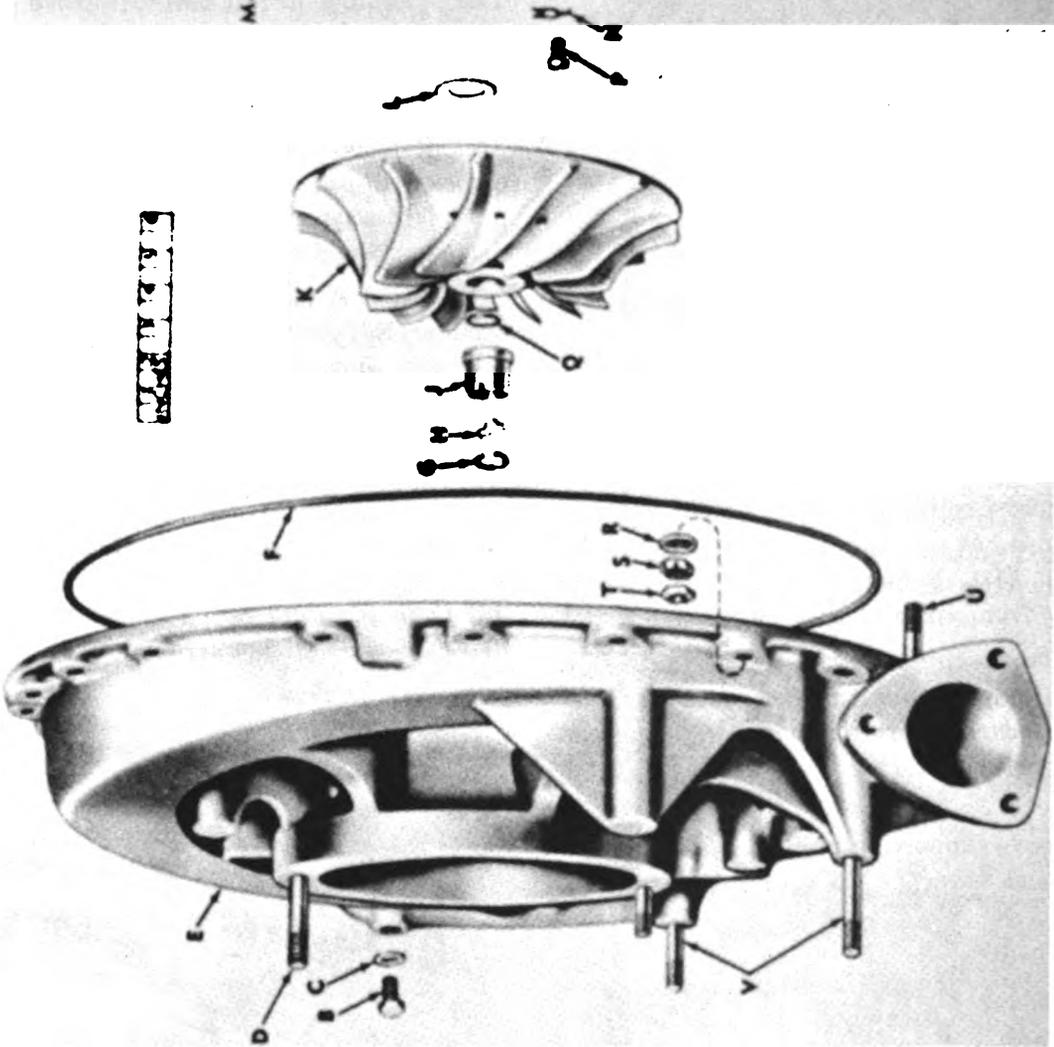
Supercharger housing, diffuser, and impeller—exploded view.
